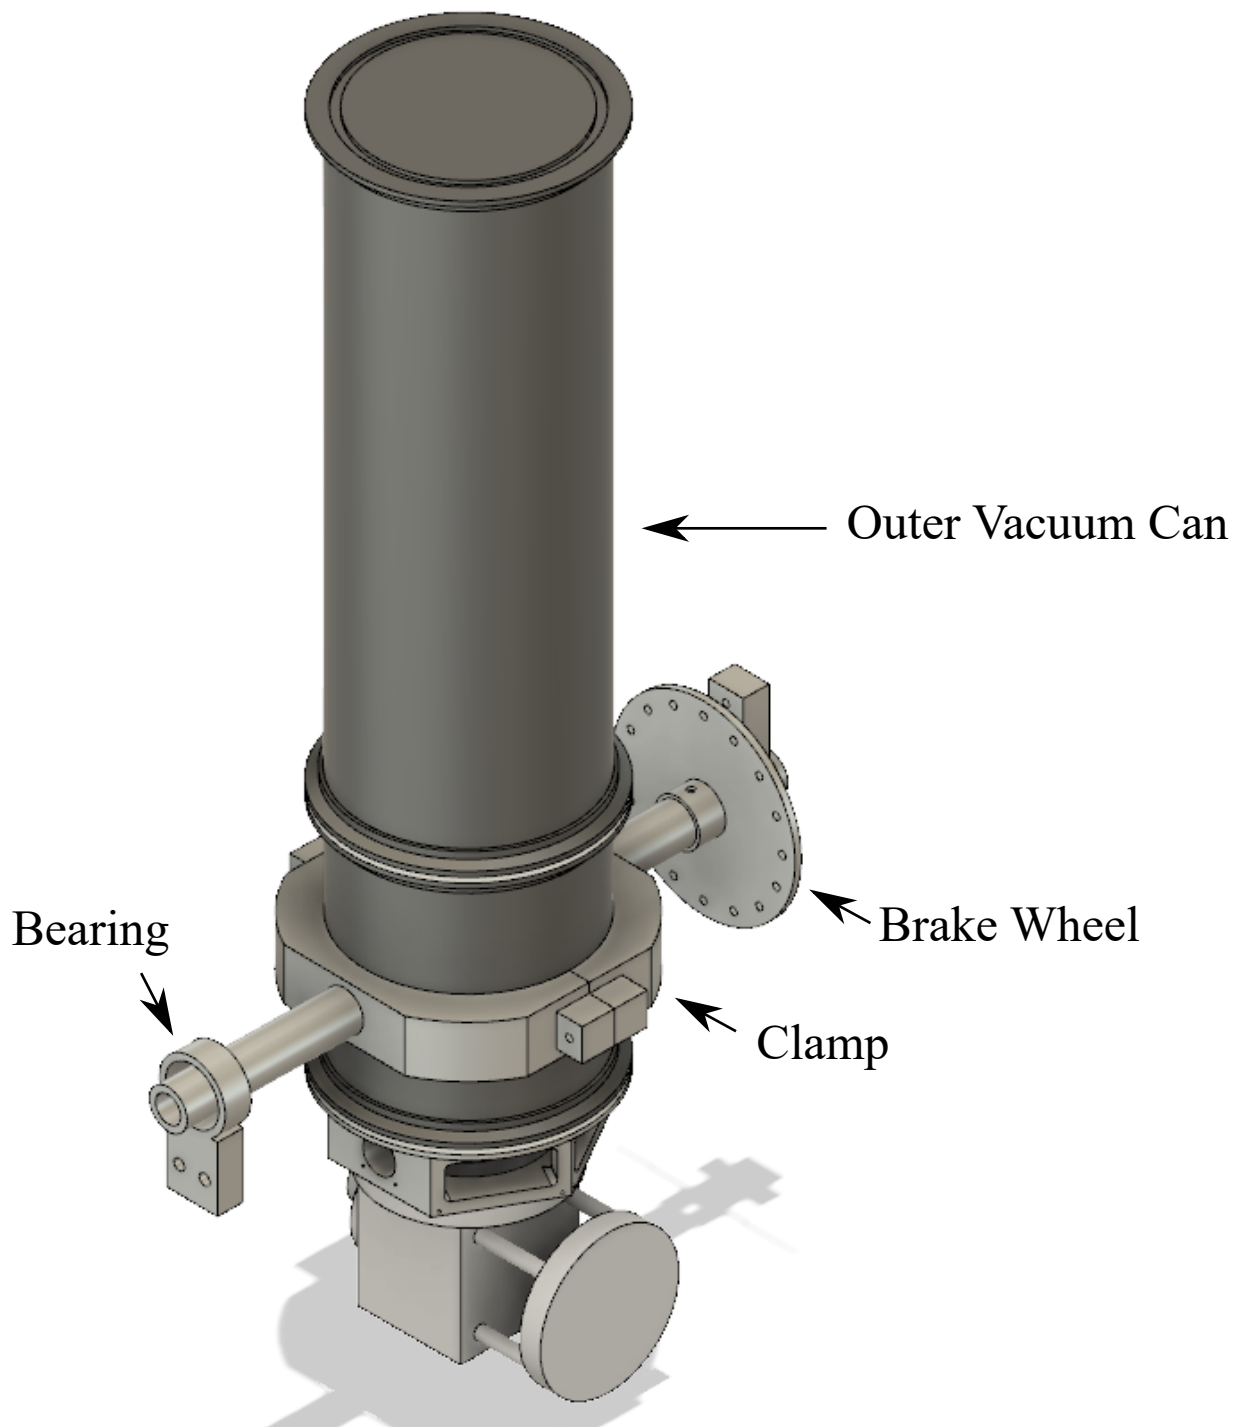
Outer assembly of the cryostat showing the mechanism by which it is rotated.
